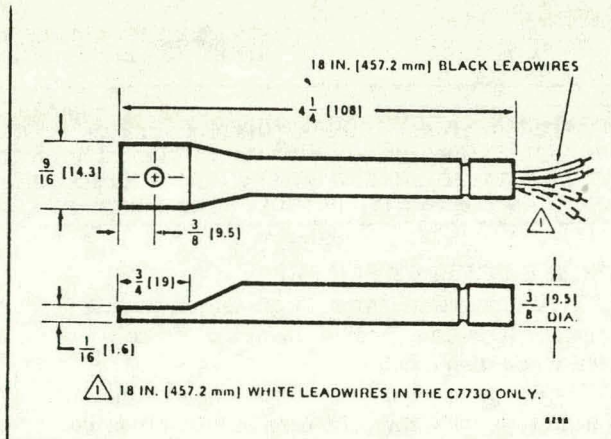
C773C,D DIMENSIONS IN INCHES [MIL-METRES IN BRACKETS].
